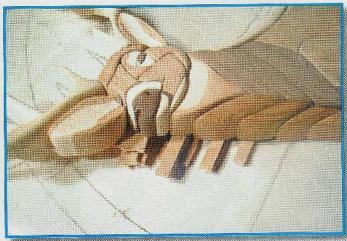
Shim the head assembly 1/8" higher than the neck.
